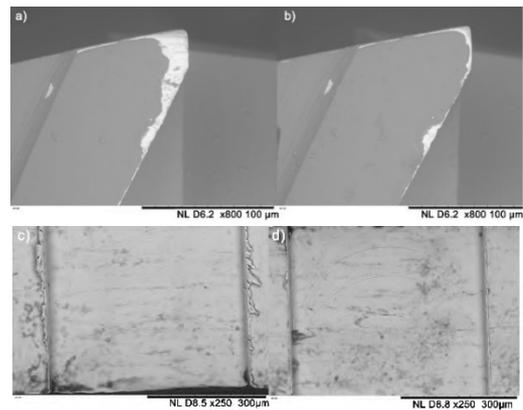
Tool wear and machined surface test results. a,b) tool wear in conventional and vibration assisted micro milling; c,d) machined surface in conventional and vibration assisted micro milling.
